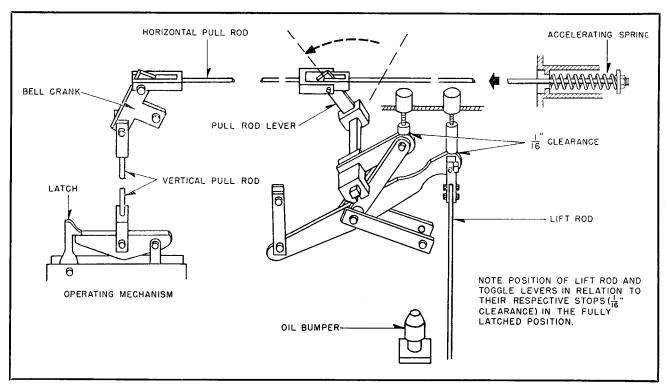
Closing Stroke of Pole Unit Lever Mechanism
